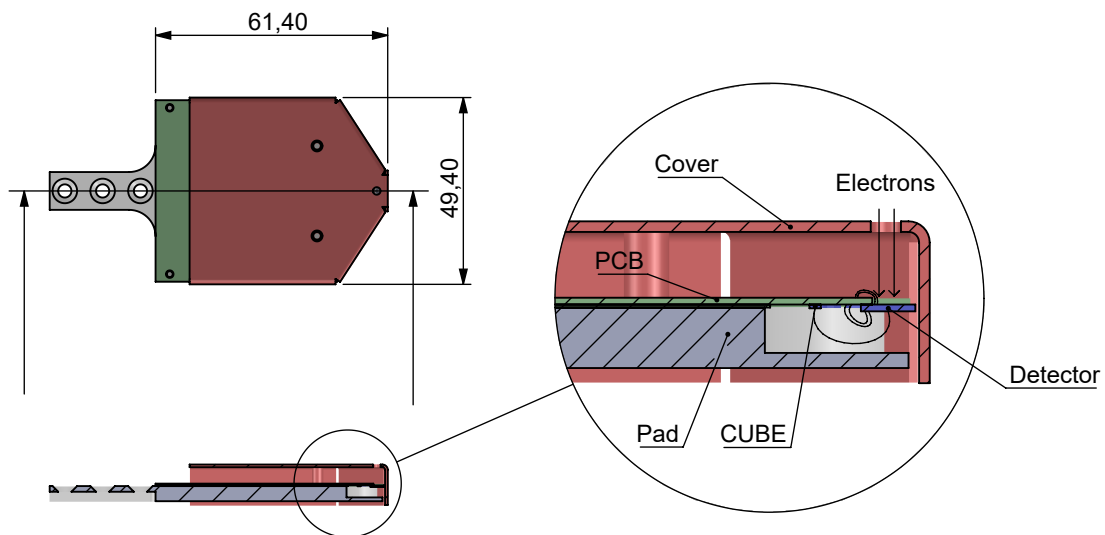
CAD drawing of the TRISTAN FBM detector board, pad and cover. The bonds that connect the detector chip with the bias voltages and CUBE amplifiers on the detector PCB can be seen in the cross section drawing on the right.
